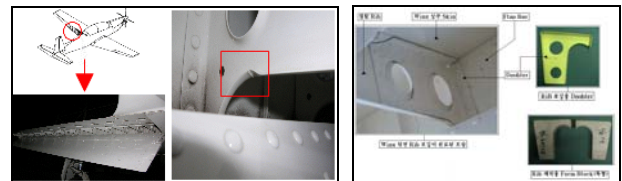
Rear assembly body of wing and shape of the repaired Rib
